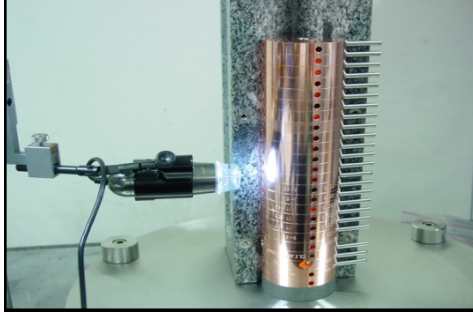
Building and inspecting copper disc stack before diffusion welding [8]
